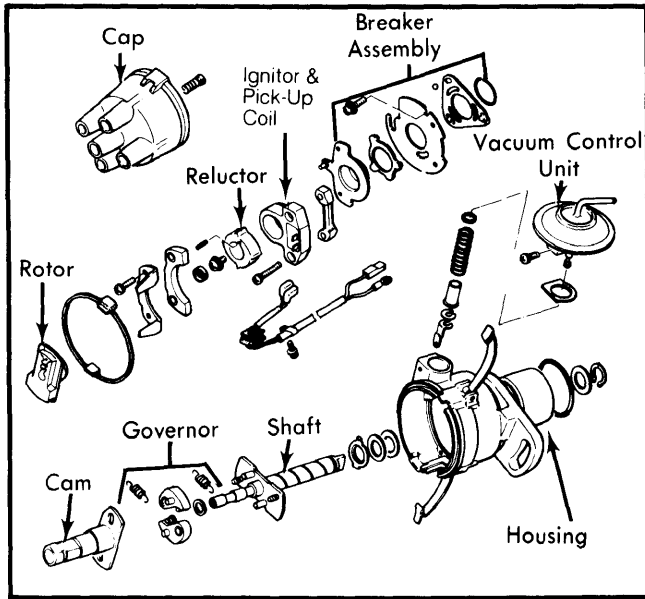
Exploded View of Mazda Distributor (GLC Shown, Others Similar)
